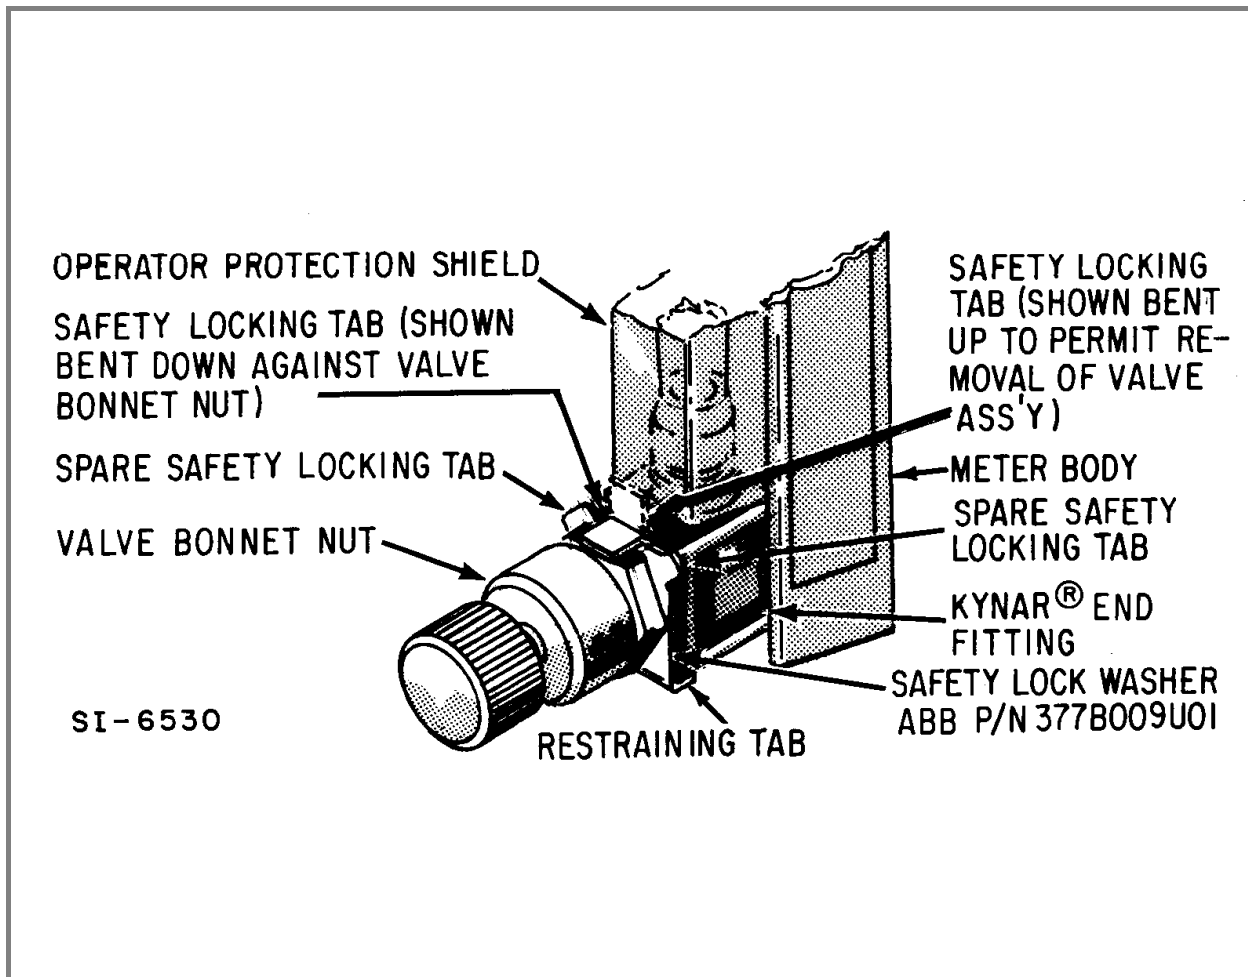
VALVE STEM ASSEMBLY FOR KYNAR END FITTING
